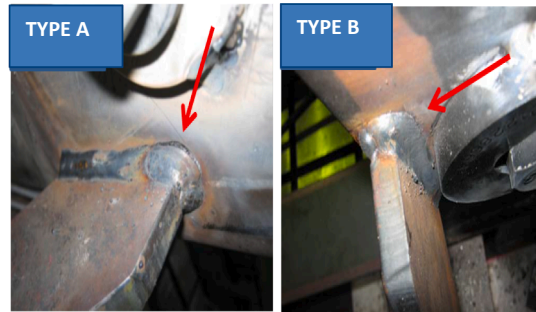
Cracks in both axle bracing supports after 3.5-T load fatigue test.
